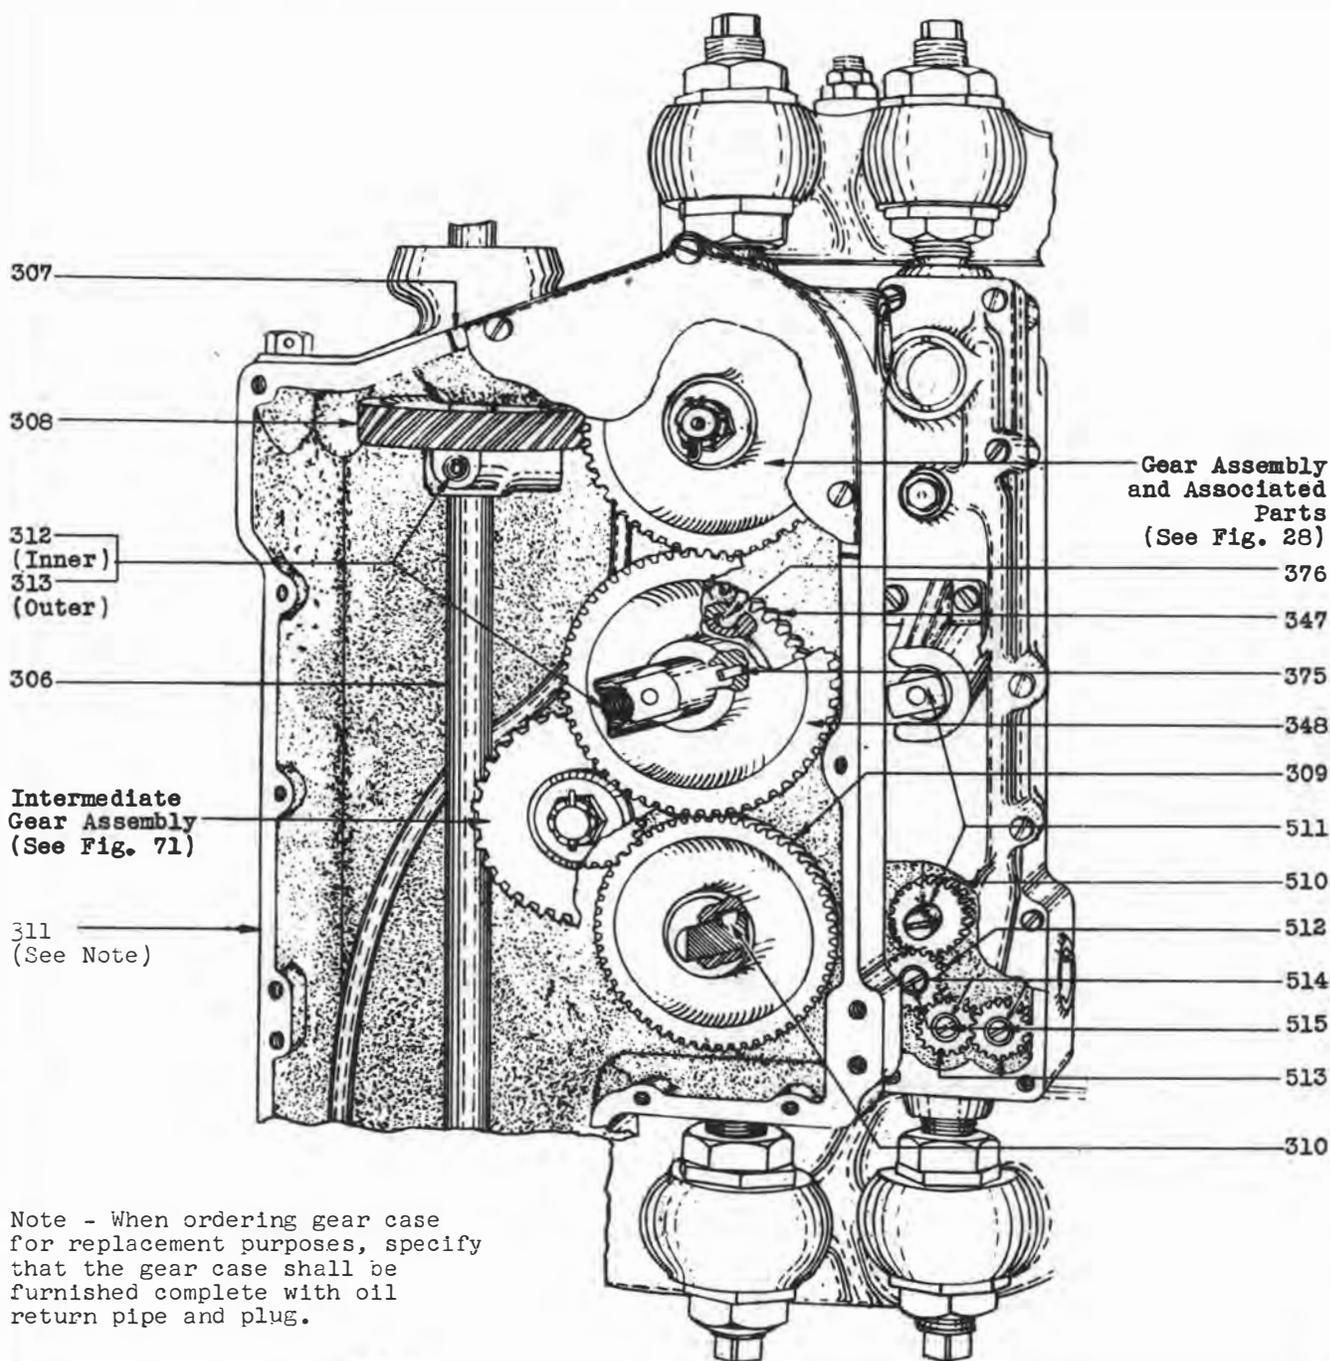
Internal Parts - Gear Case and Bearing Box
